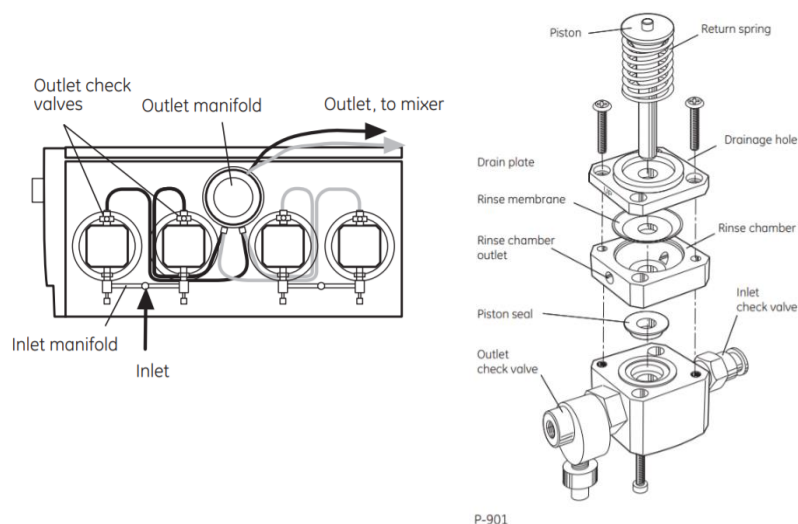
Pump P-900 system (left) and exploded scheme of a single P-901 pump (right) [10].
